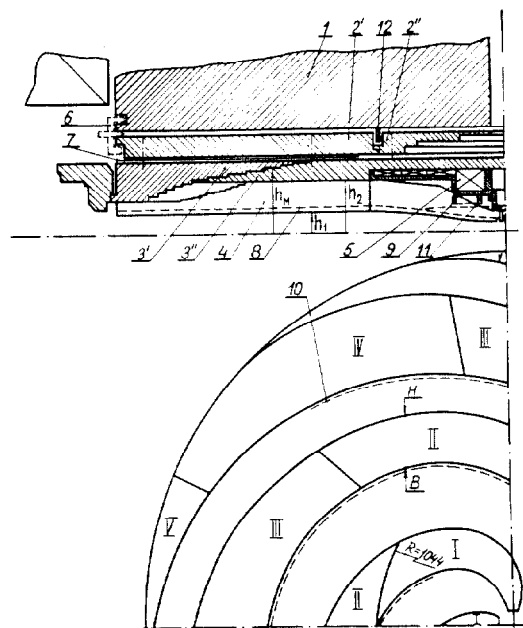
The schematic drawing of the phasotron magnetic system. 1 - pole; 2 - external disk; 3 - internal disk; 4 - spiral iron pieces; 5 - concentric coils; 6 - external wedge-out device; 7 - sector iron pieces; 8 - correcting rods; 9 - harmonic coil; 10 - side straps; 11 - centre-placed sector iron pieces; 12 - centre-placed wedge-out device.
